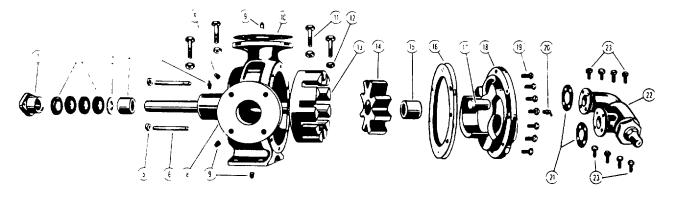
EXPLODED VIEW MODEL J32, K32, KK32 AND L32 PUMP
